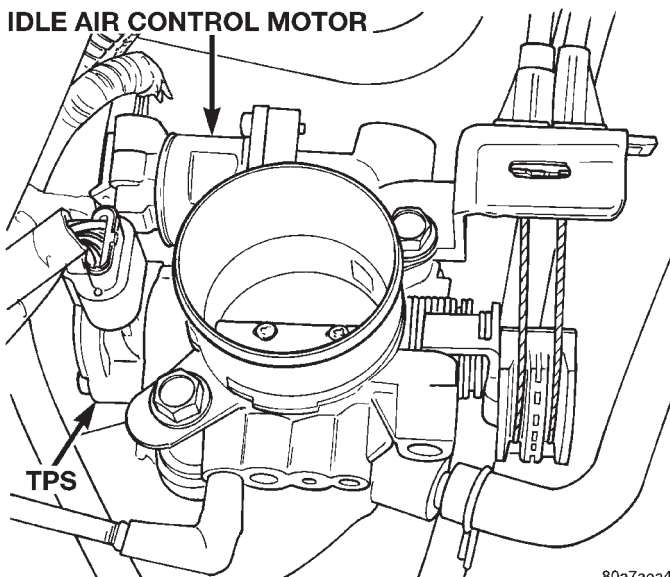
Throttle Position Sensor and Idle Air Control Motor—2.4L
